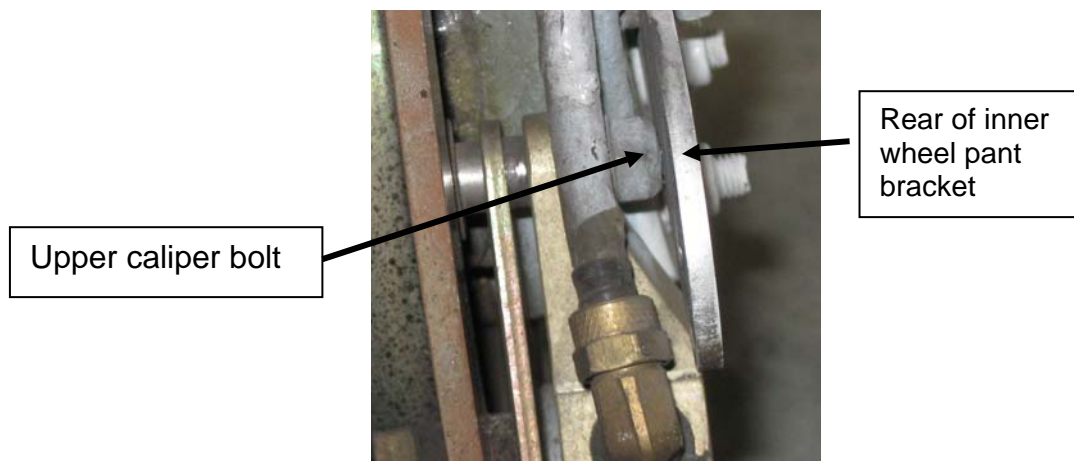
Rear view of left caliper and bracket. With brake applied, caliper bolt contacts bracket. (Note slight bow in bracket.)
